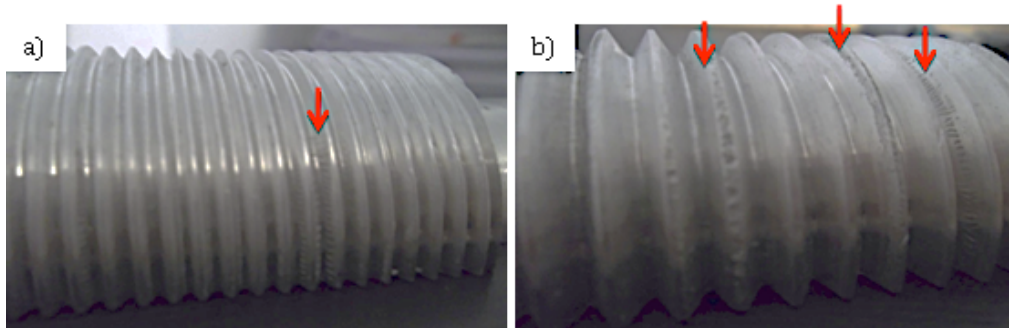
Threads machined on cold-spray showing a smooth surface with machining flaws; a) surface of 1.5-12UNJ and b) surface of 1.5-6UNJ. Arrows point to surface flaws after machining of cold sprayed pure Al.
